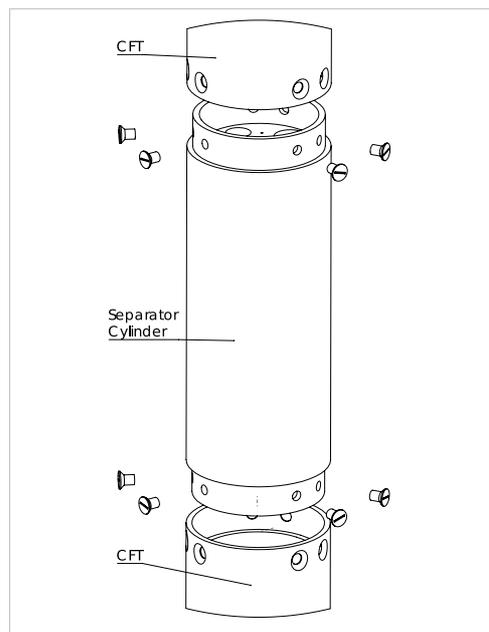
View of the CFT's fitting to the separator cylinder (inner piping is hidden for clarity).
